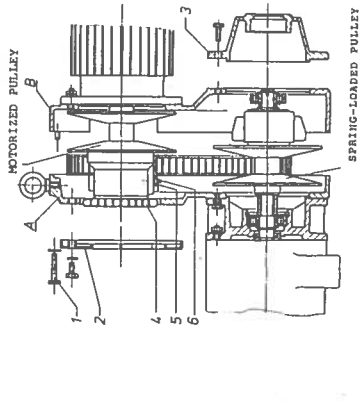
The Basic Belt Drive, Sizes VZ1...VZ4
